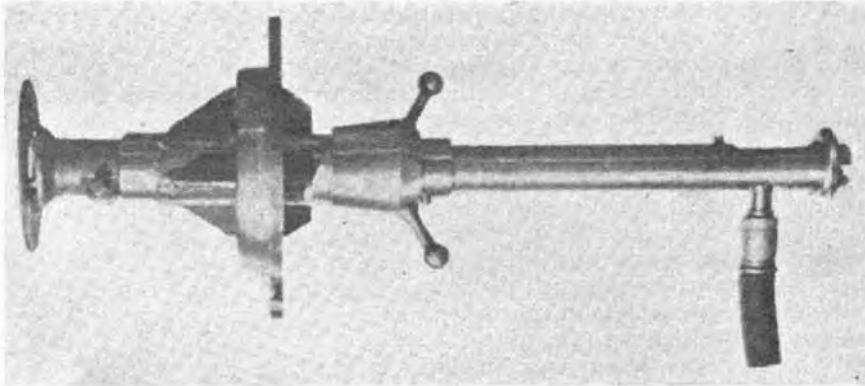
SPRAYER ASSEMBLY IN PARKED POSITION, SHOWING TIP PLATE, SPRAYER CARRIAGE AND FLEXIBLE HOSE
